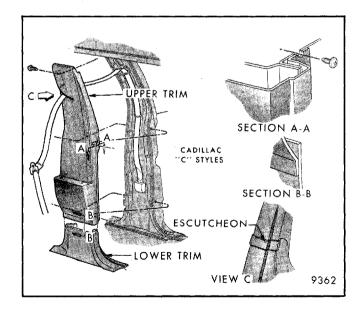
Center Pillar Trim Attachment - Cadillac C Styles
